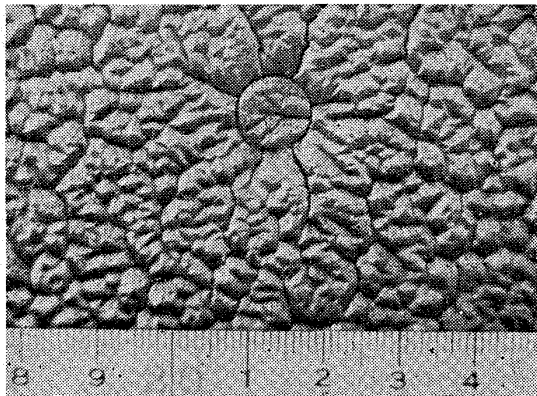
Roll surfaces and plugged-in piece after rolling ($\times 0.8$).
